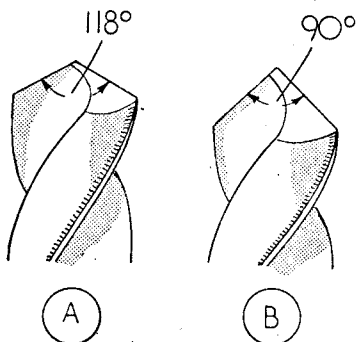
"A"—standard twist drill; "B"—the drill reground as a countersink
